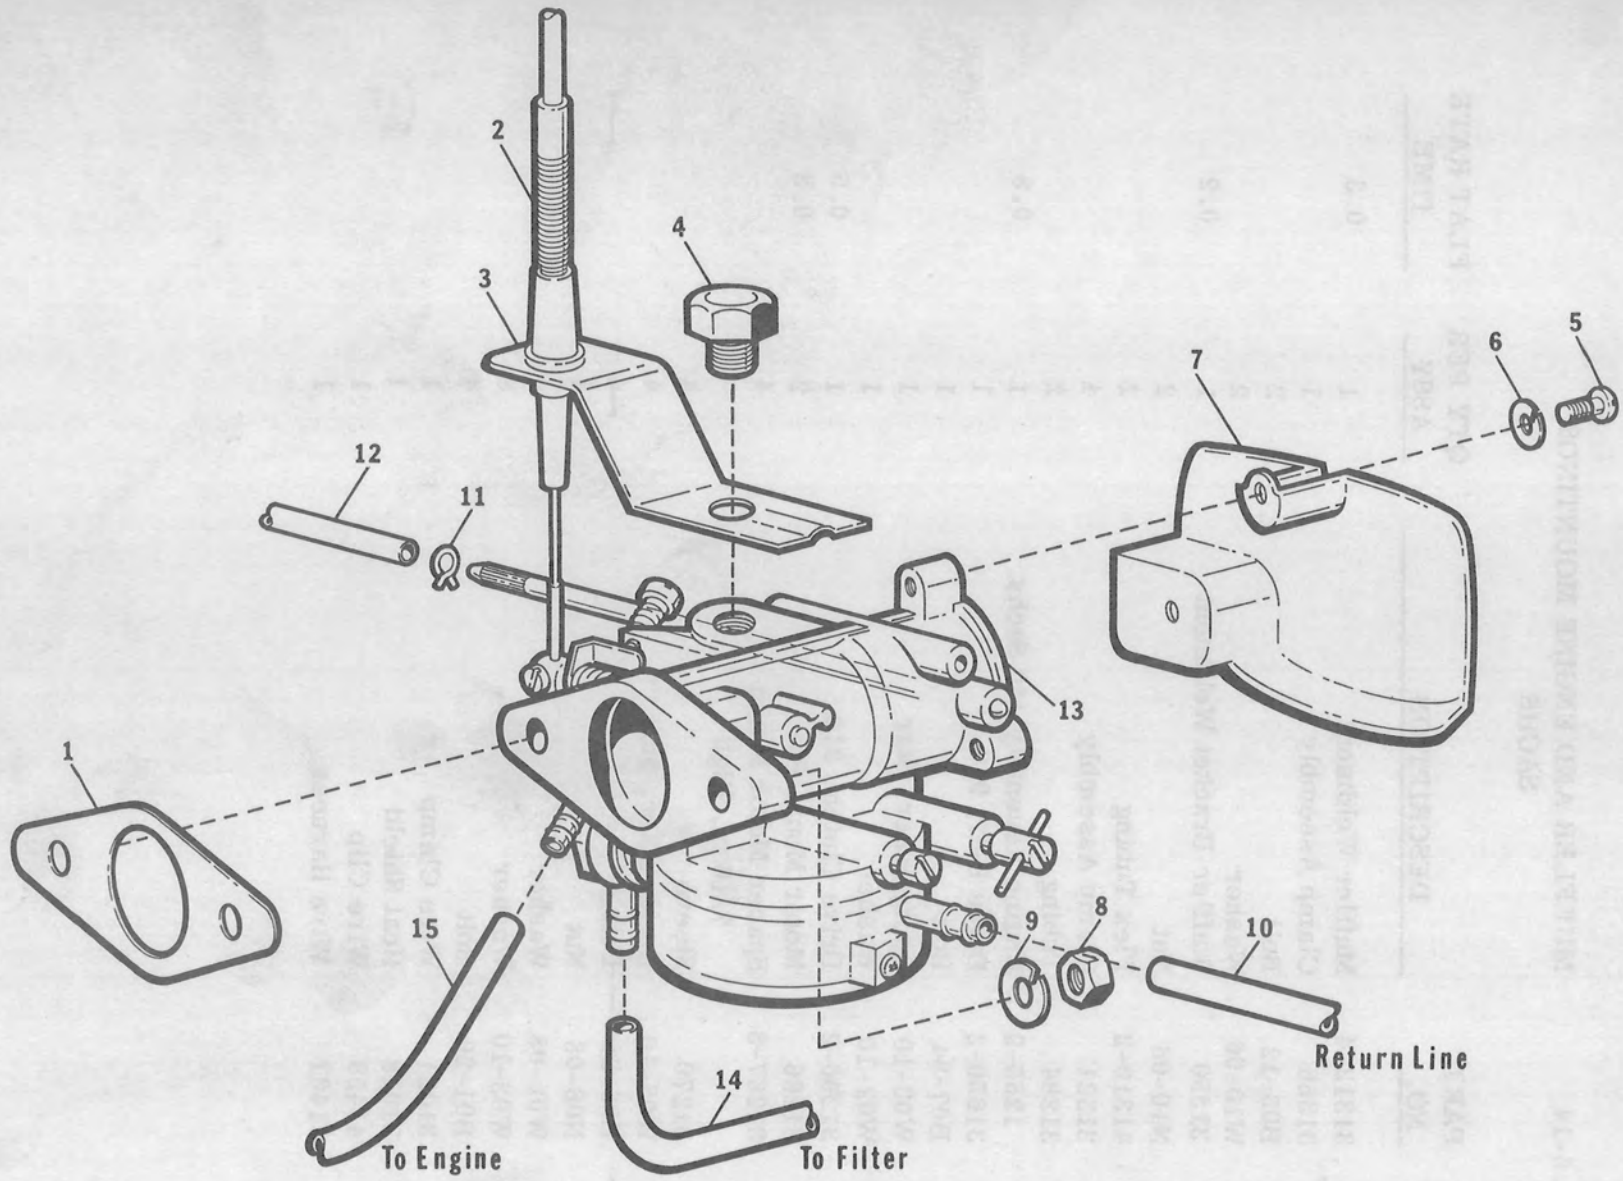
KEIHIN CARBURETOR ASSEMBLY
